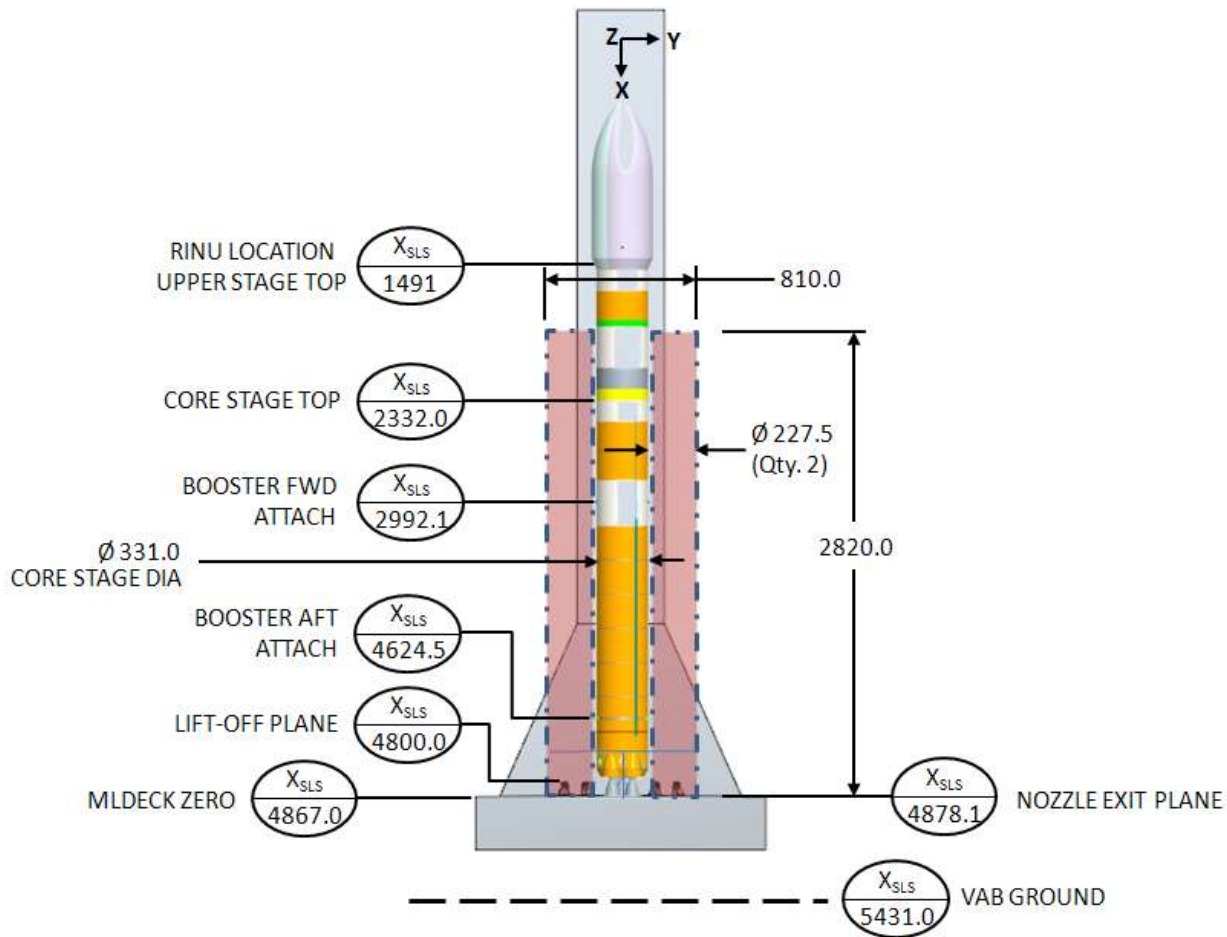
NASA Elevation Drawing - Mechanical Interfaces & Sizing Constraints
